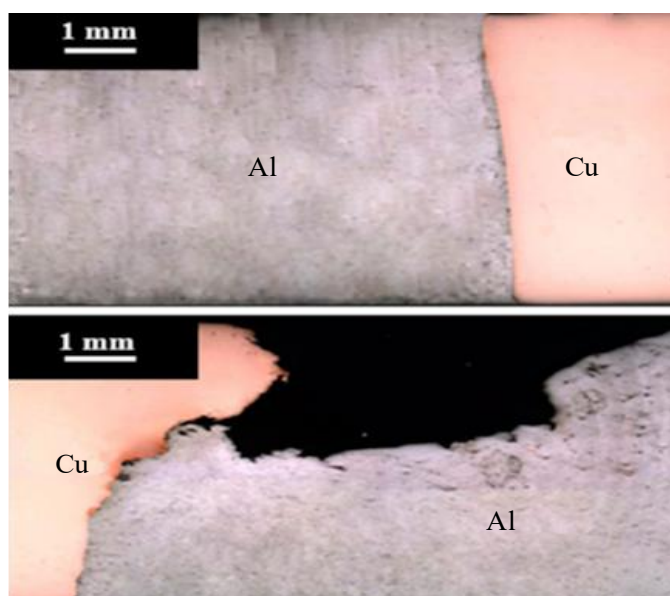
Explosive welding of copper and aluminium [22].
